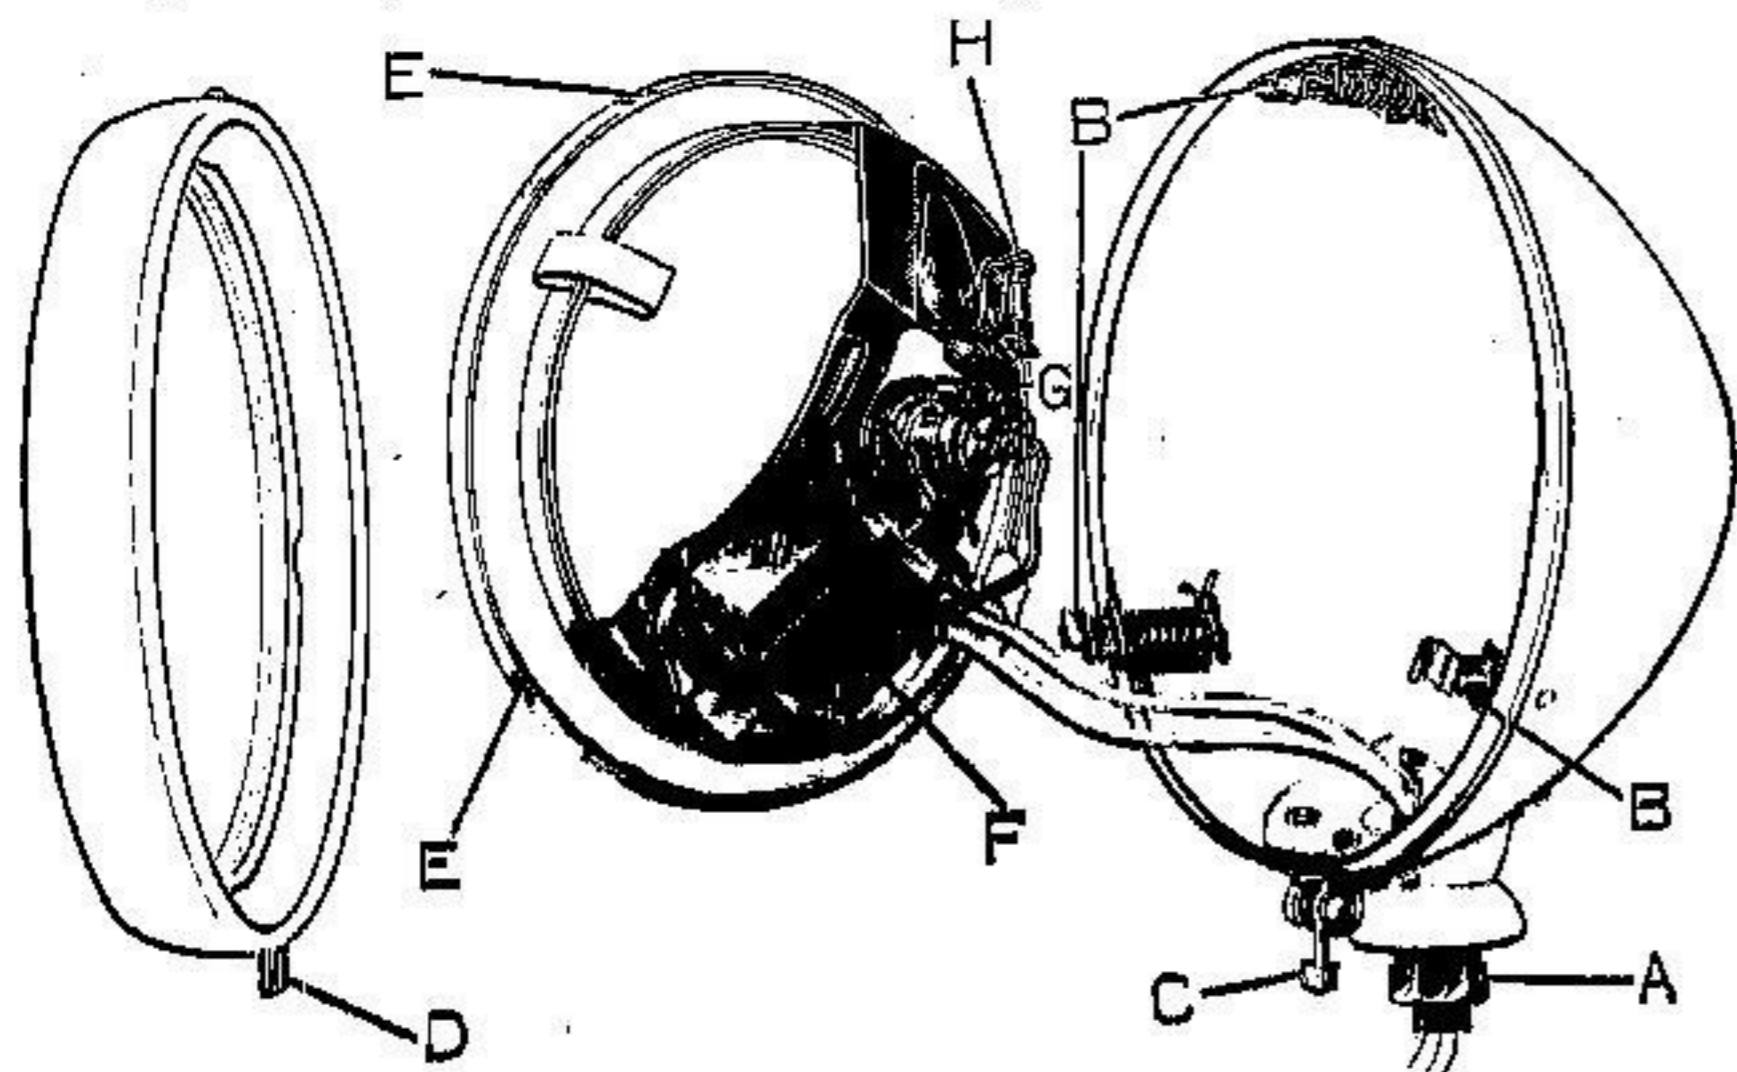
HEAD LAMP TYPE R140BEDS DISMANTLED.
